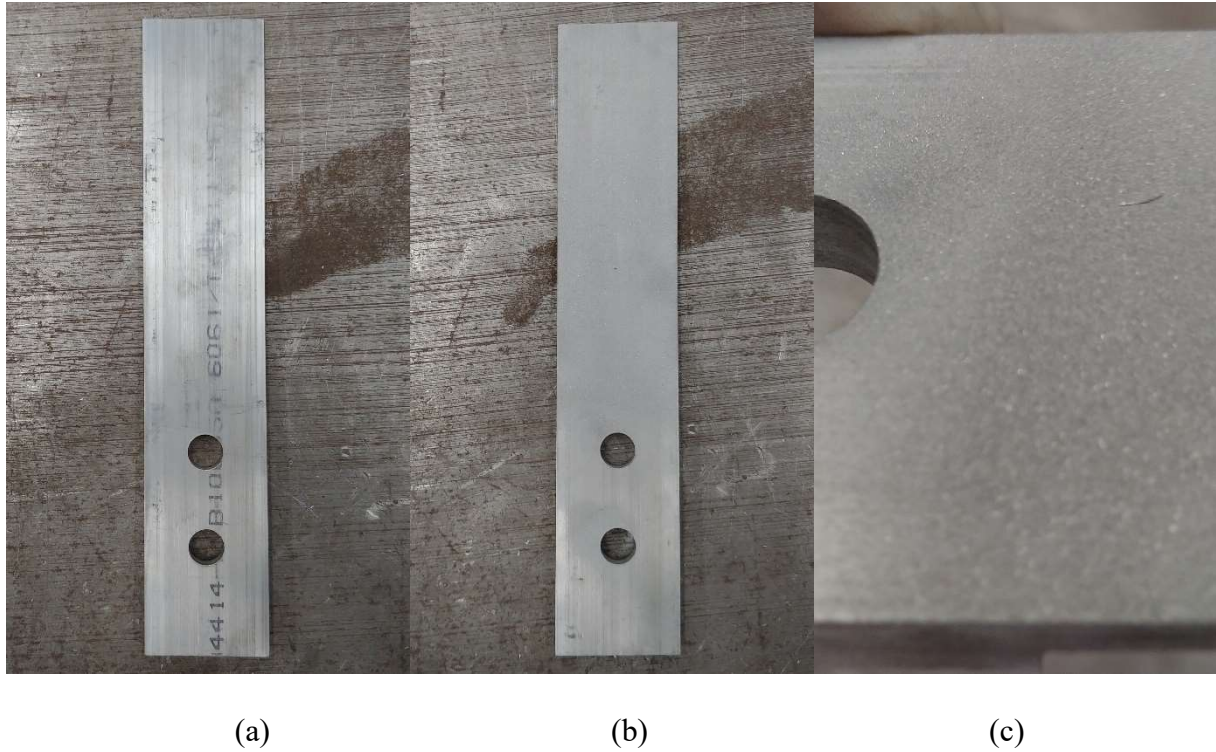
2 (a) Aluminum plate before sand blasting, (b) aluminum plate sand blasted surface, (c) aluminum plate sand blasted surface close up
